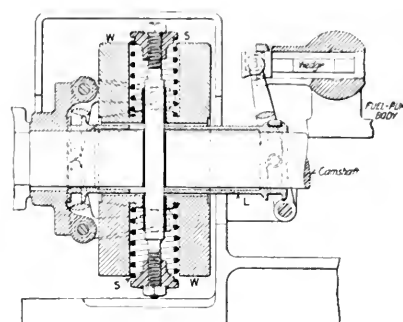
GOVERNOR AND PARTS OF FUEL VALVE OF THE MCEWEN ENGINE
